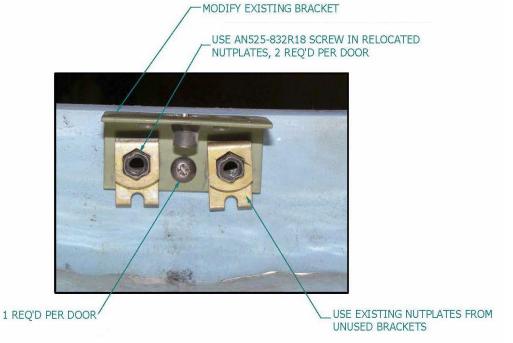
Cessna 208 / 208B Bracket / Nutplate Assembly
